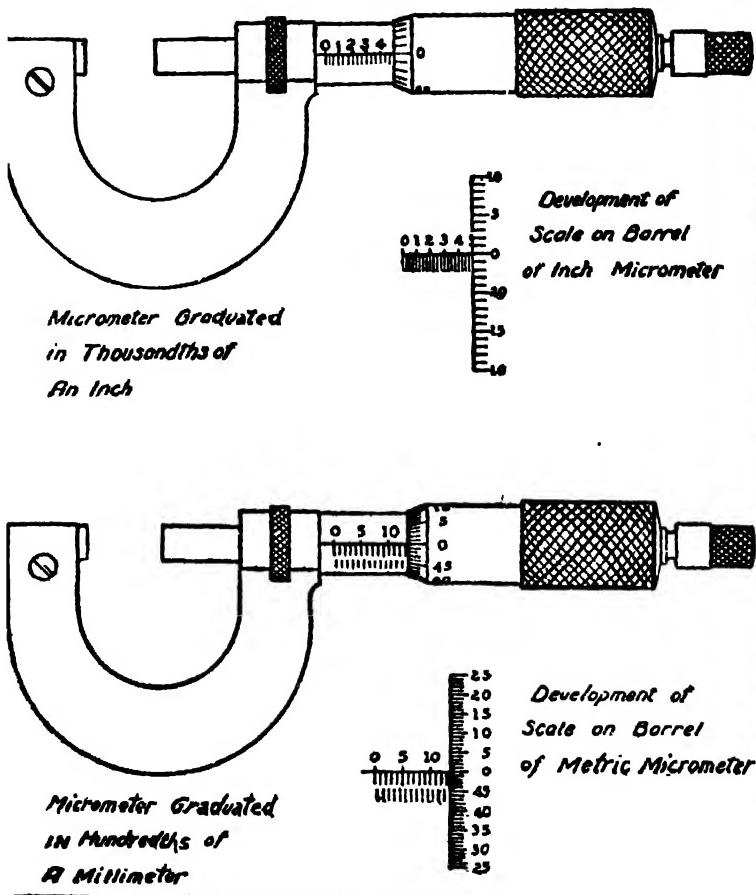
Standard Forms of Micrometer Caliper for External Measurements.
